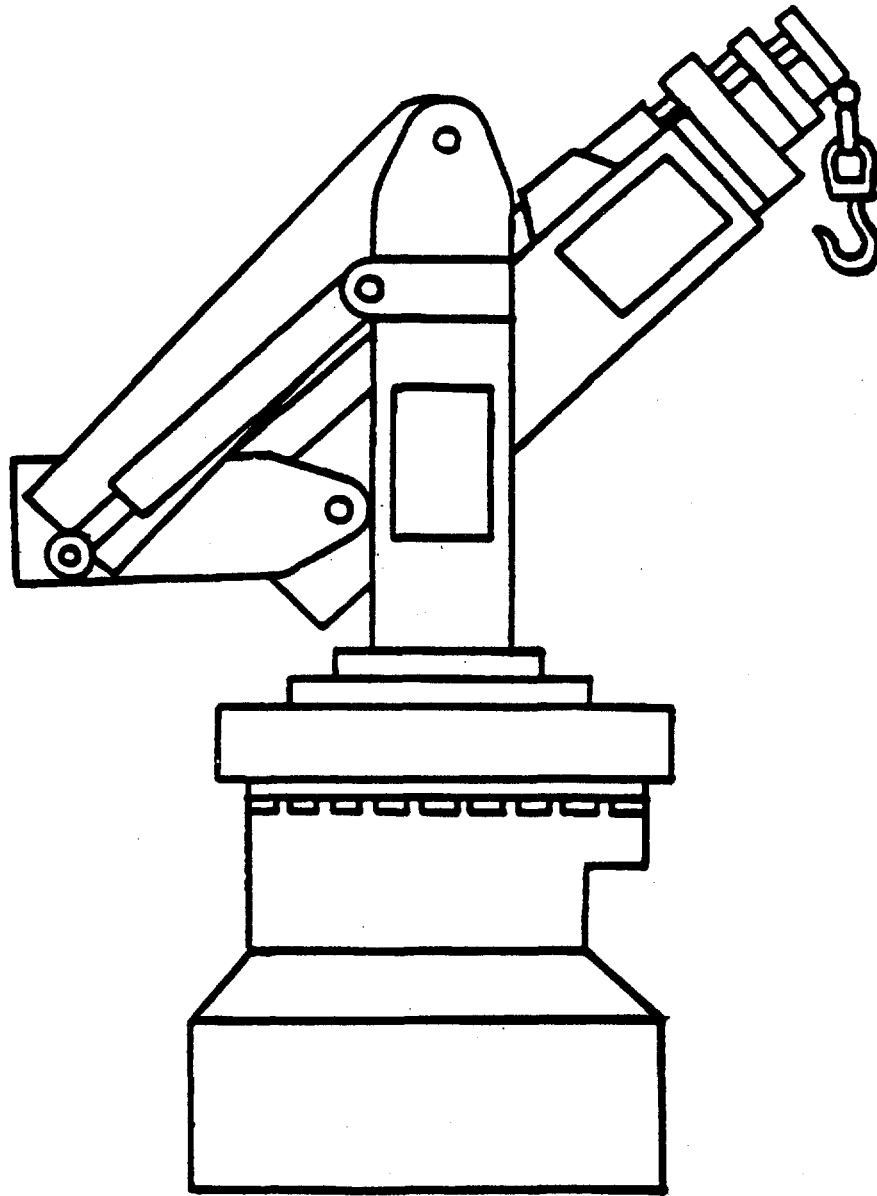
Bow Crane in Traveling (Stowed) Position
